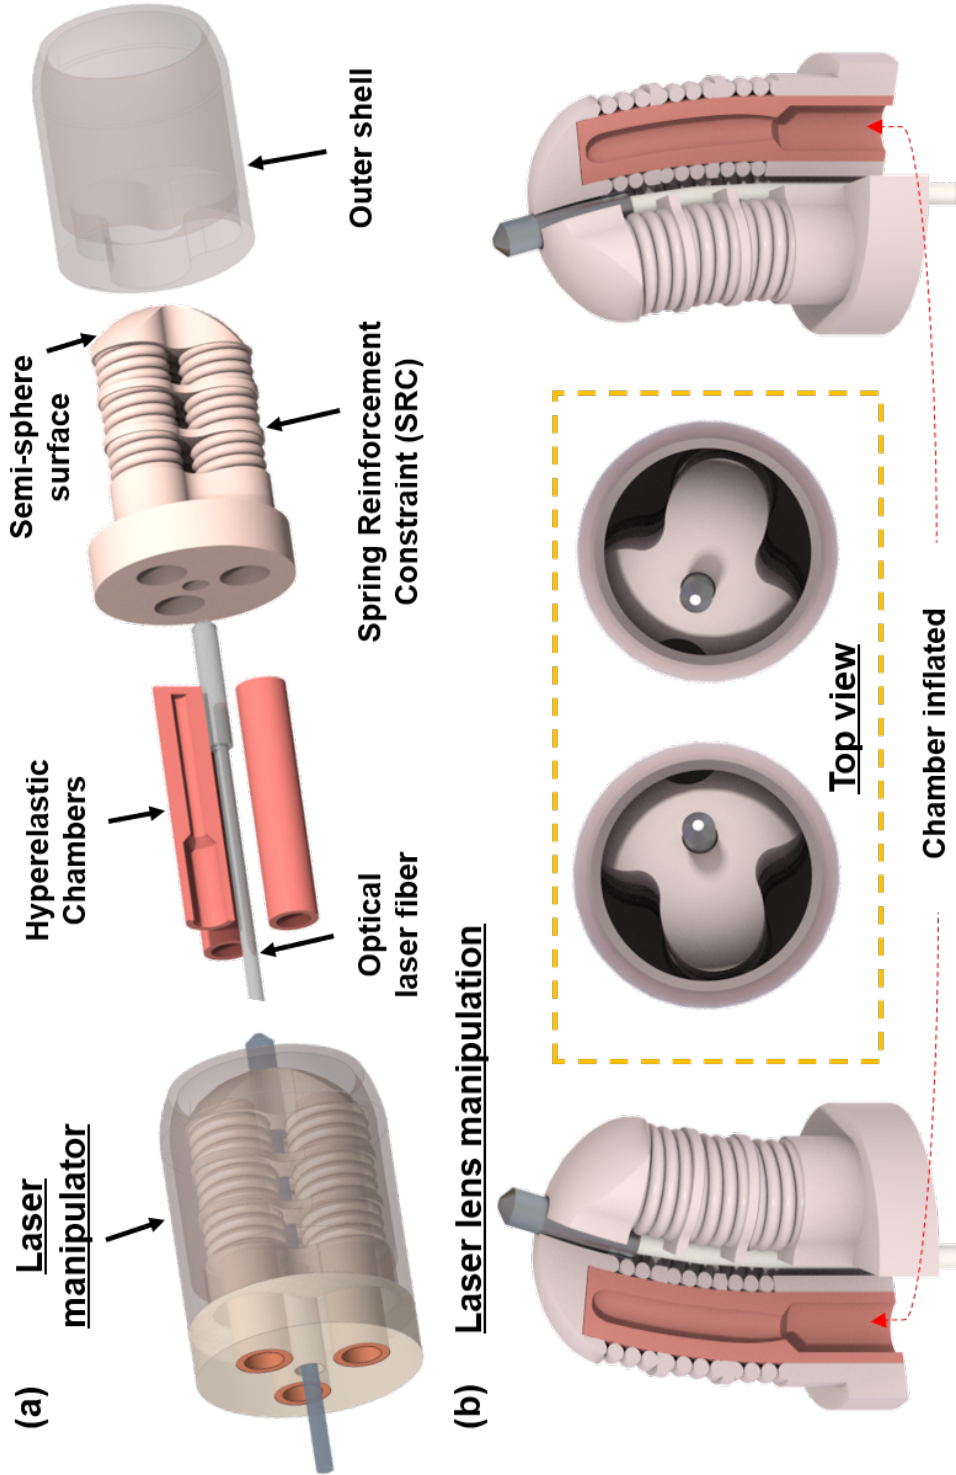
Design of the soft robotic laser steering system. (a) Laser manipulator integrating three soft chambers with rigid spring reinforcement constraints. An outer shell protects the robot bending and laser steering from external disturbances. The hyper-elastic chambers are 3D-printed from flexible AgilusClear30™. The outer shell and SRCs are 3D-printed from VeroClear™. (b) The laser lens is housed in the center channel of the laser manipulator and can be steered omni-directionally.
